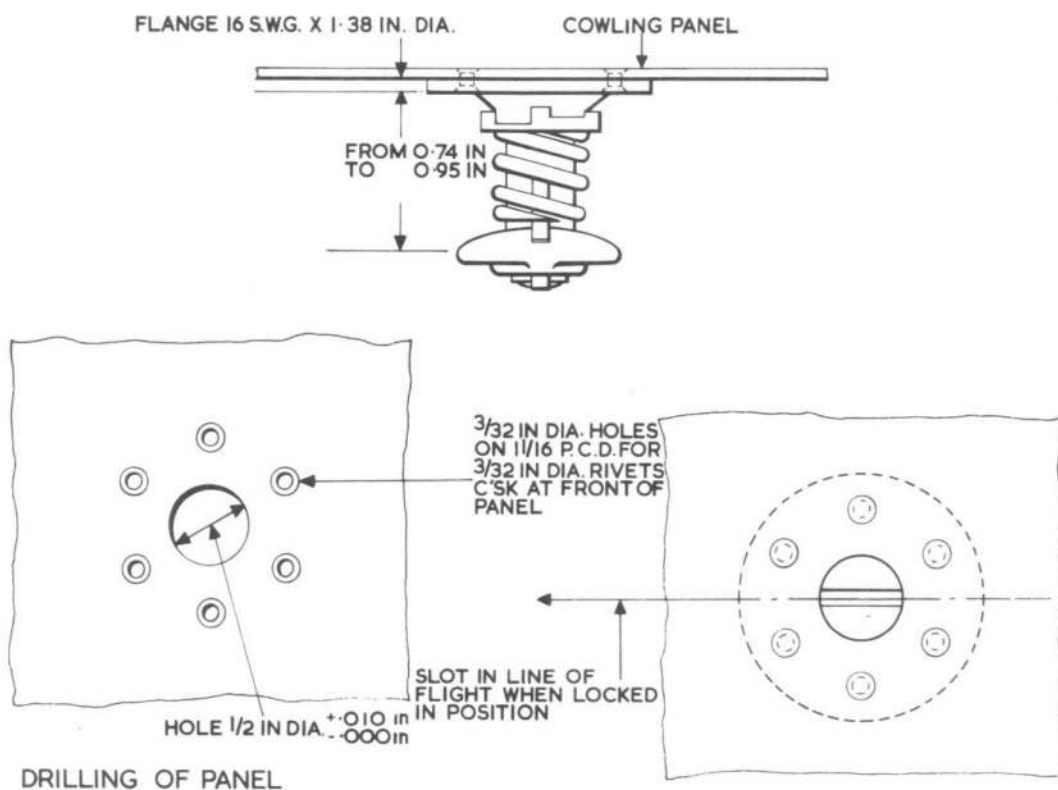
Mounting a fastener, Type 1, on the back of the cowling
